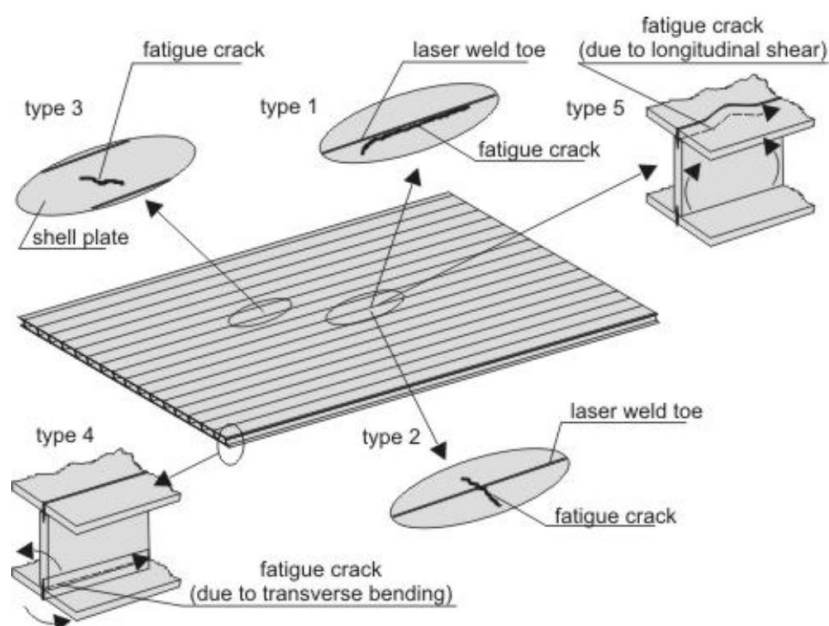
Fatigue crack occurrences in laser-welded web core sandwich decks (Kozak, 2005).
